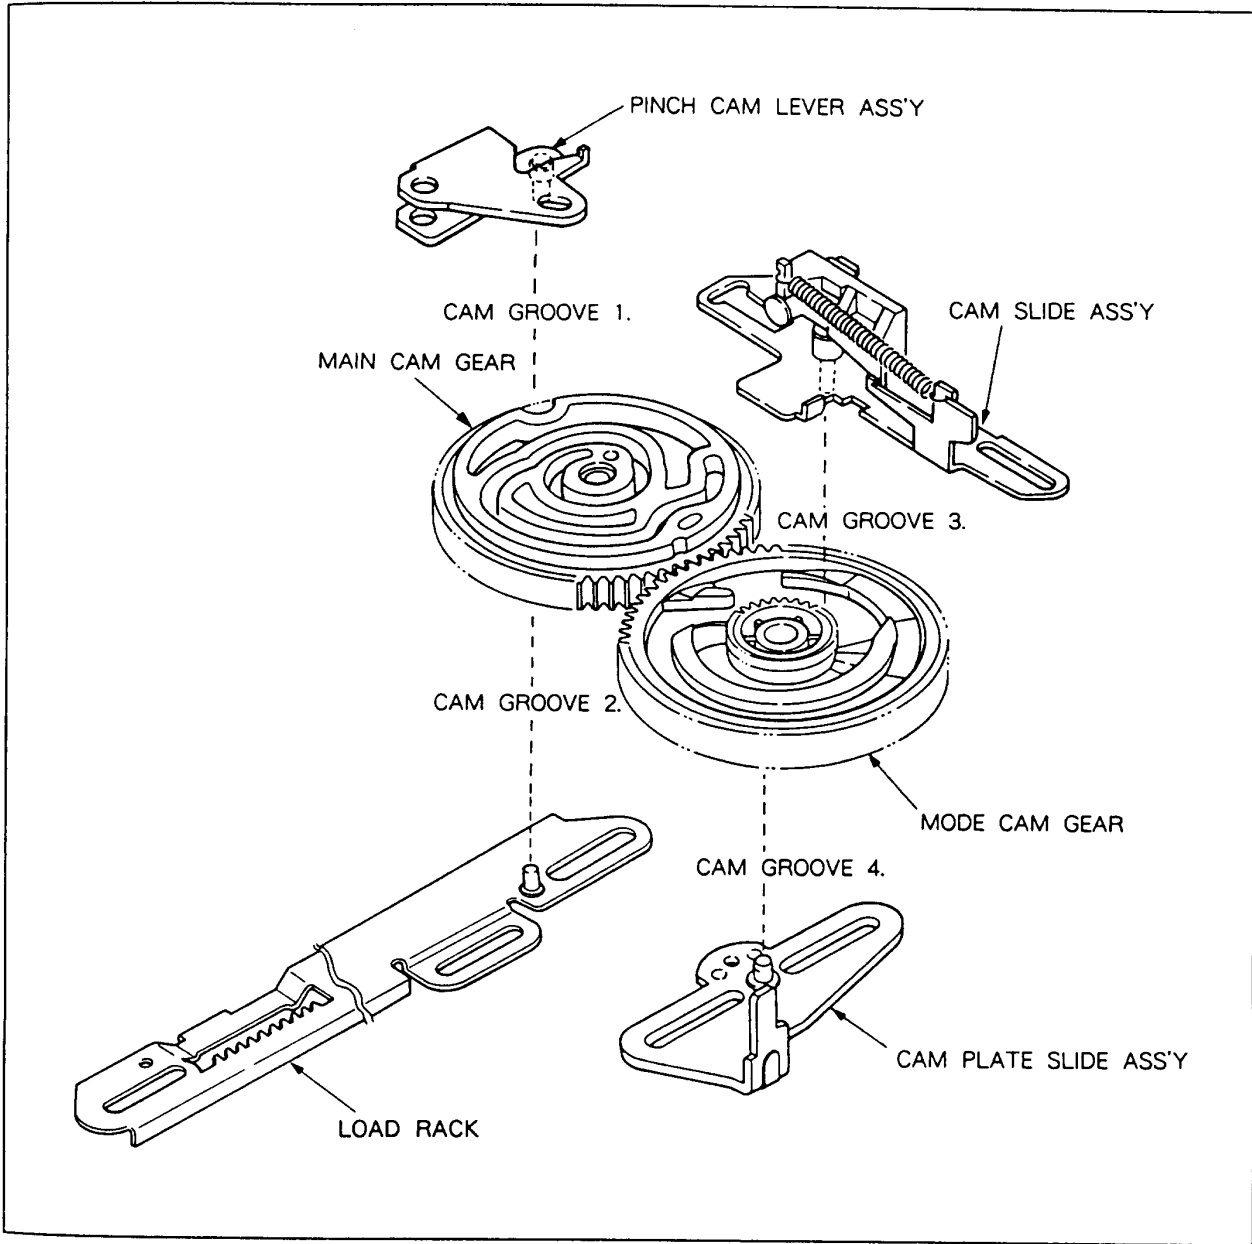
PLAN OF CAMS CONSTRUCTION
